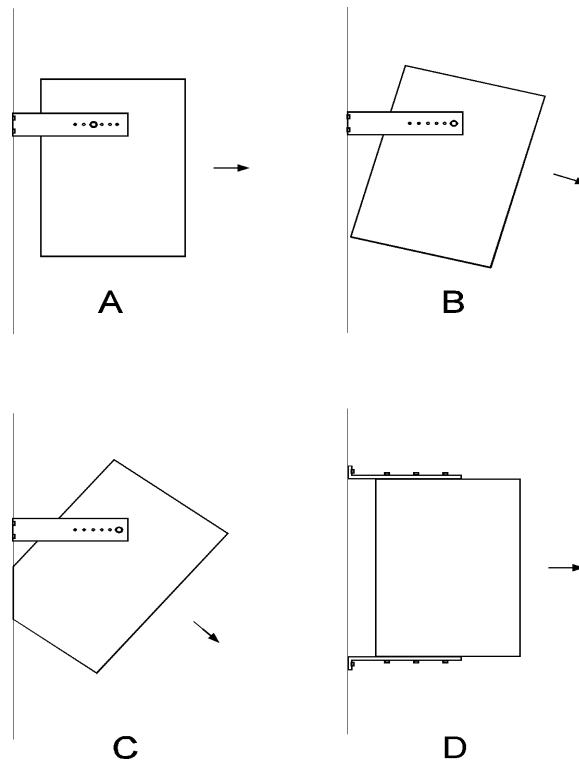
Wall Mounting Applications of the WB1 Brackets
